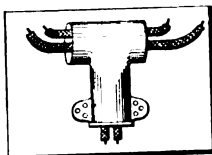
T-fitting which may be used to hold wires so that they will not chafe
